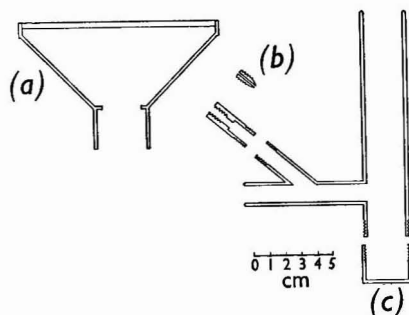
Burner assembly: (a) interchangeable burner head; (b) interchangeable fuel-inlet jet; (c) main burner
